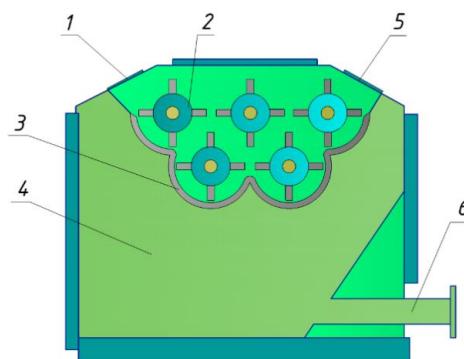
Five-drum shaking machine proposed by S.A. Noskova
